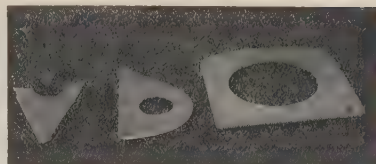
BLANKED, AND BLANKED AND PUNCHED COMPONENTS MADE OF 1/4-IN-THICK STEEL PLATE
